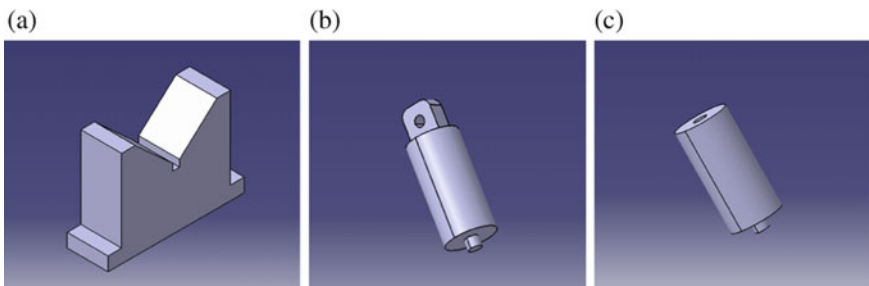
Three-dimensional design of a V block; b standoff; c feet
